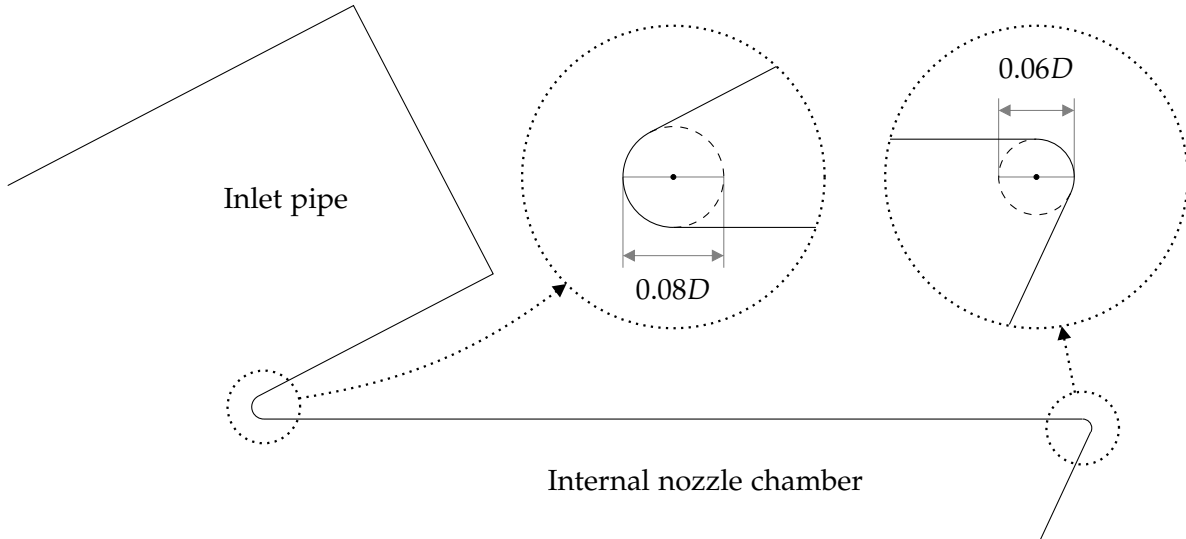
Schematic of the nozzle inlet section with the added fillets and their dimensions.
